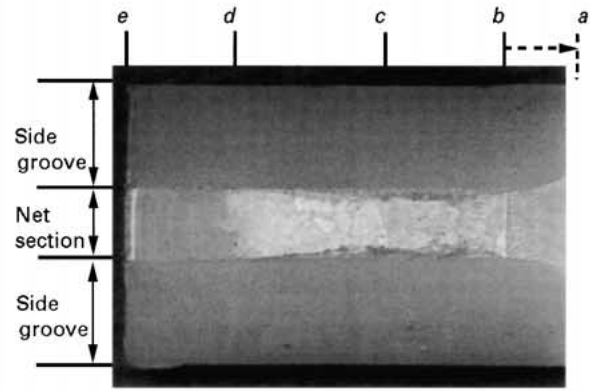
A typical fracture surface for TPB specimens showing three stages of fracture.  $b-c$ : long term craze failure,  $c-d$ : short term ductile failure, and  $d-e$ : rapid crack growth.
